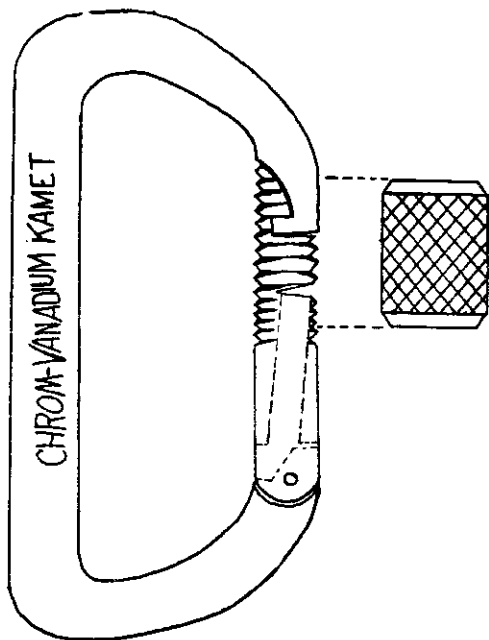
A manufacturing flaw in a Kamet where the return spring hole was drilled crooked and actually emerged through the threads.
